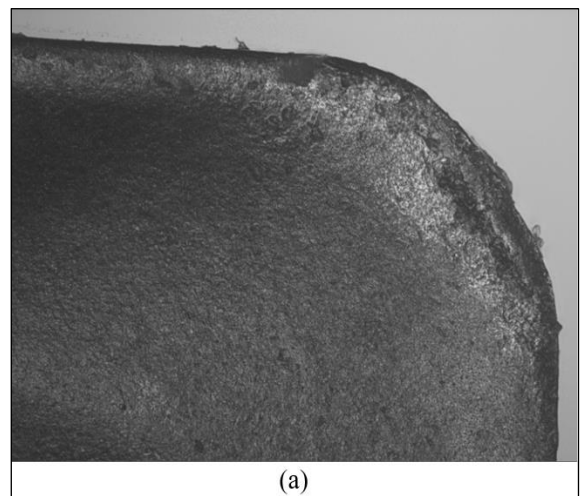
Wear on the cutting tool rake surface with insert 0,8 mm: (a) Without sealant.
